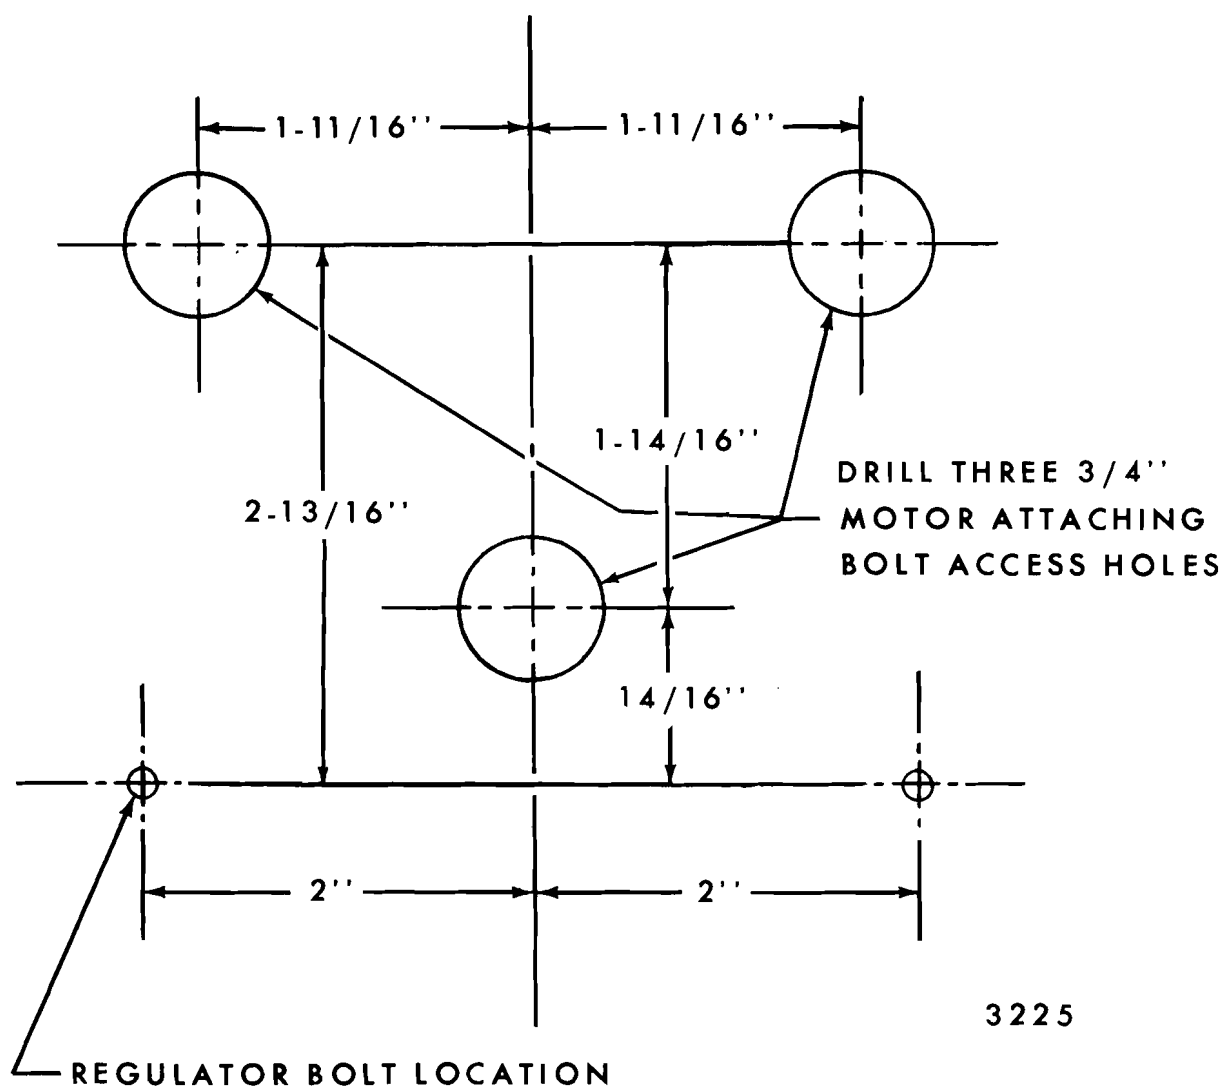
Window Regulator Lower Attaching Bolt Reference Points for Locating Window Motor to Regulator Attaching Bolts - "F" Styles
